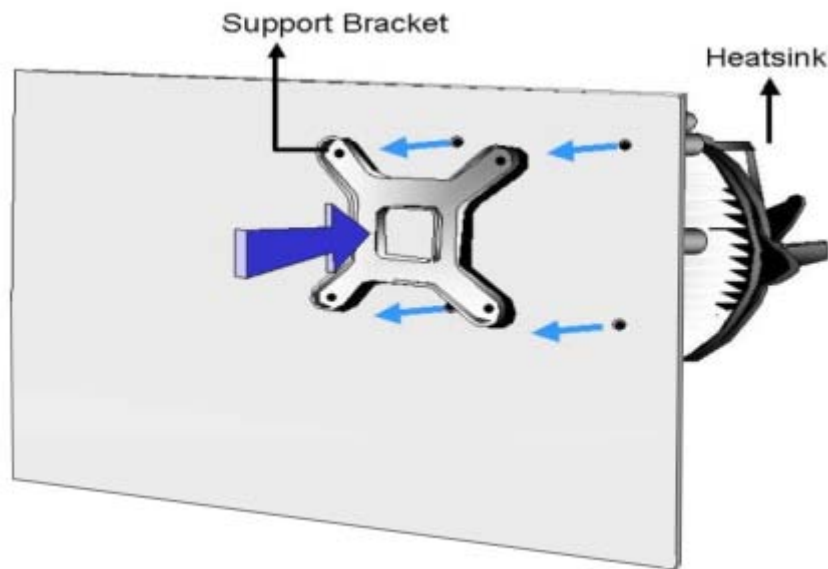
Securing the Heat sink to the IMBA-G412ISA
